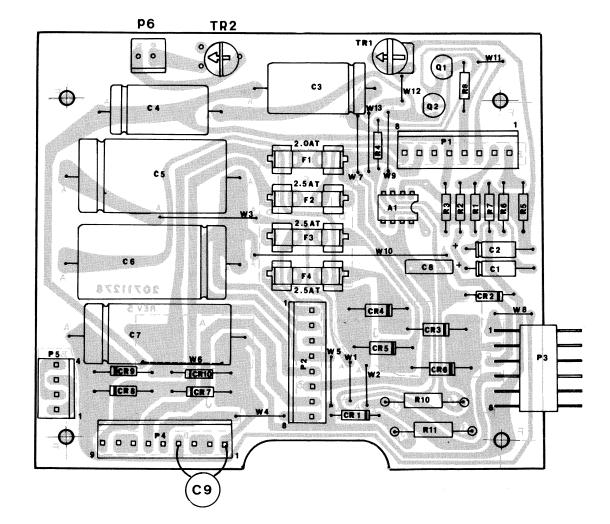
Power Supply PCB Assembly (Autofocus Models Only)
